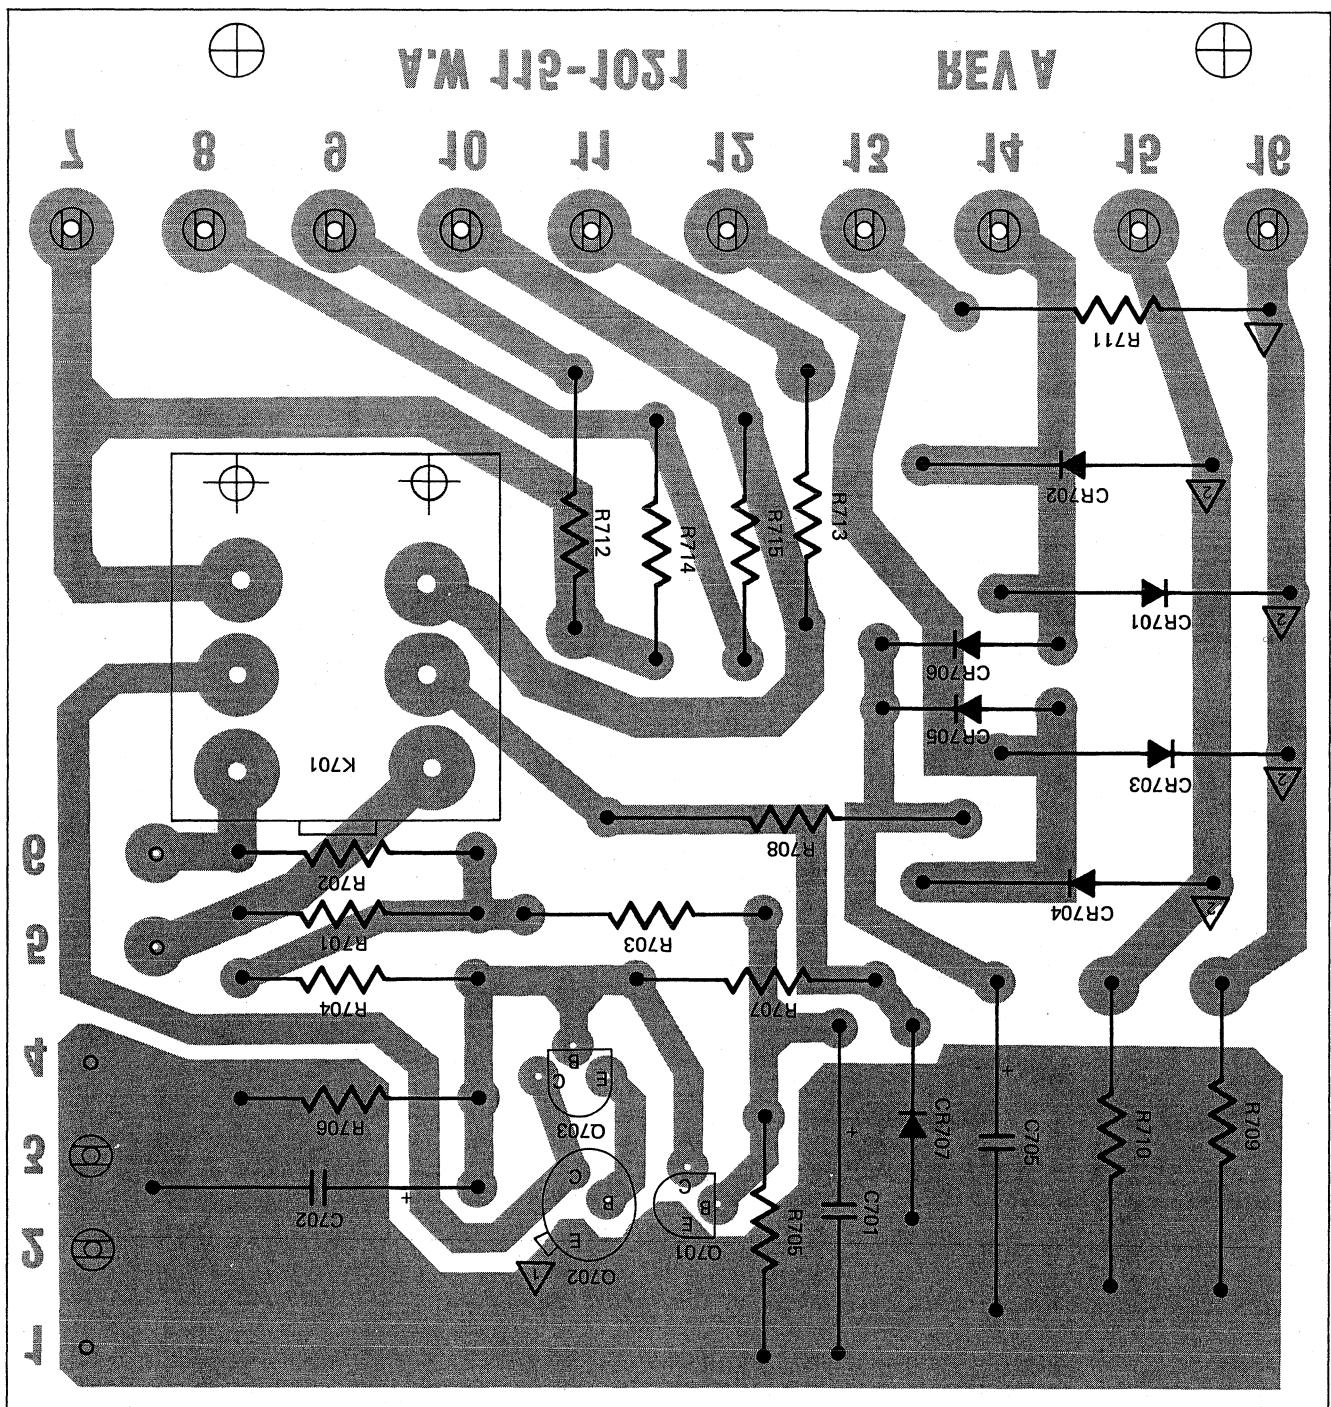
Rectifier/Relay Board - A8 Component Assembly Diagram
